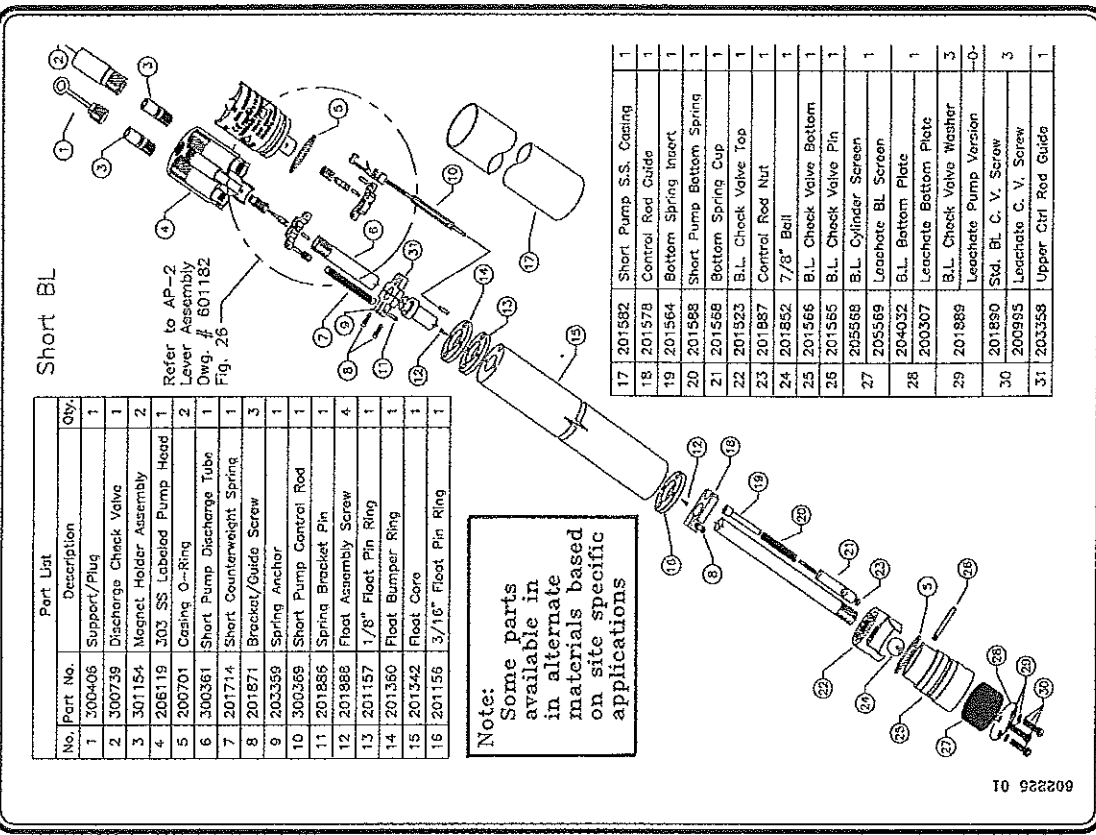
Exploded View of a Short Bottom-Loading Autopump AP-2
